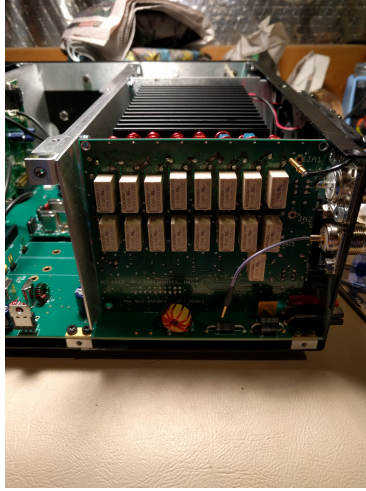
Side view of the MFJ-950K3 mounted in the K3S
